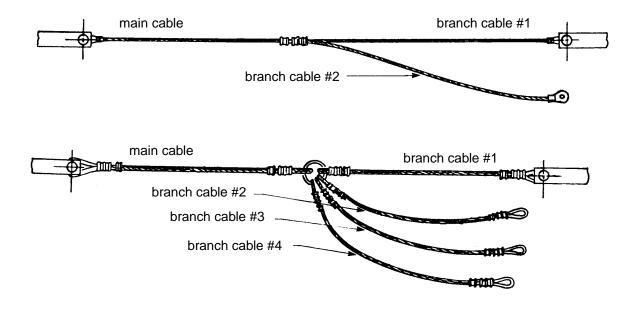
Cable Assemblies with Main Cable and Branch Cables Attached
